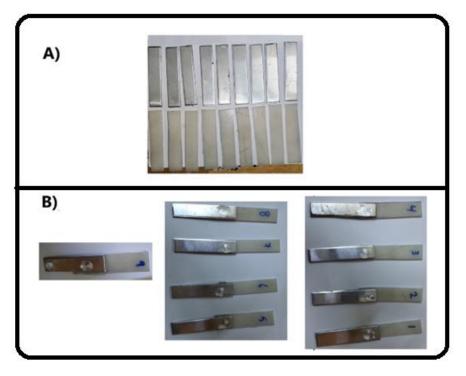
Experimental joint specimens of PE-AL; A) before joining, and B) after joining
